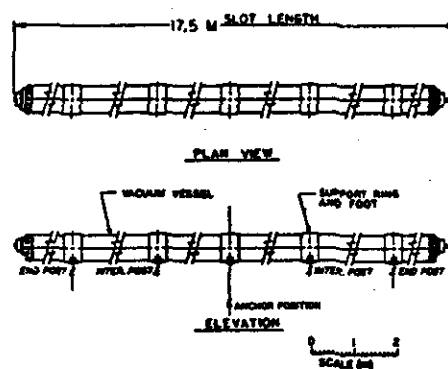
External details of the dipole magnet assembly. The cold mass is supported at five points relative to the vacuum vessel which is the principal flexural element of the assembly.
